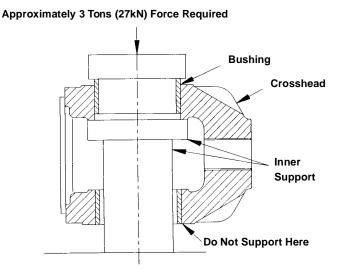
CROSSHEAD BUSHING REPLACEMENT
